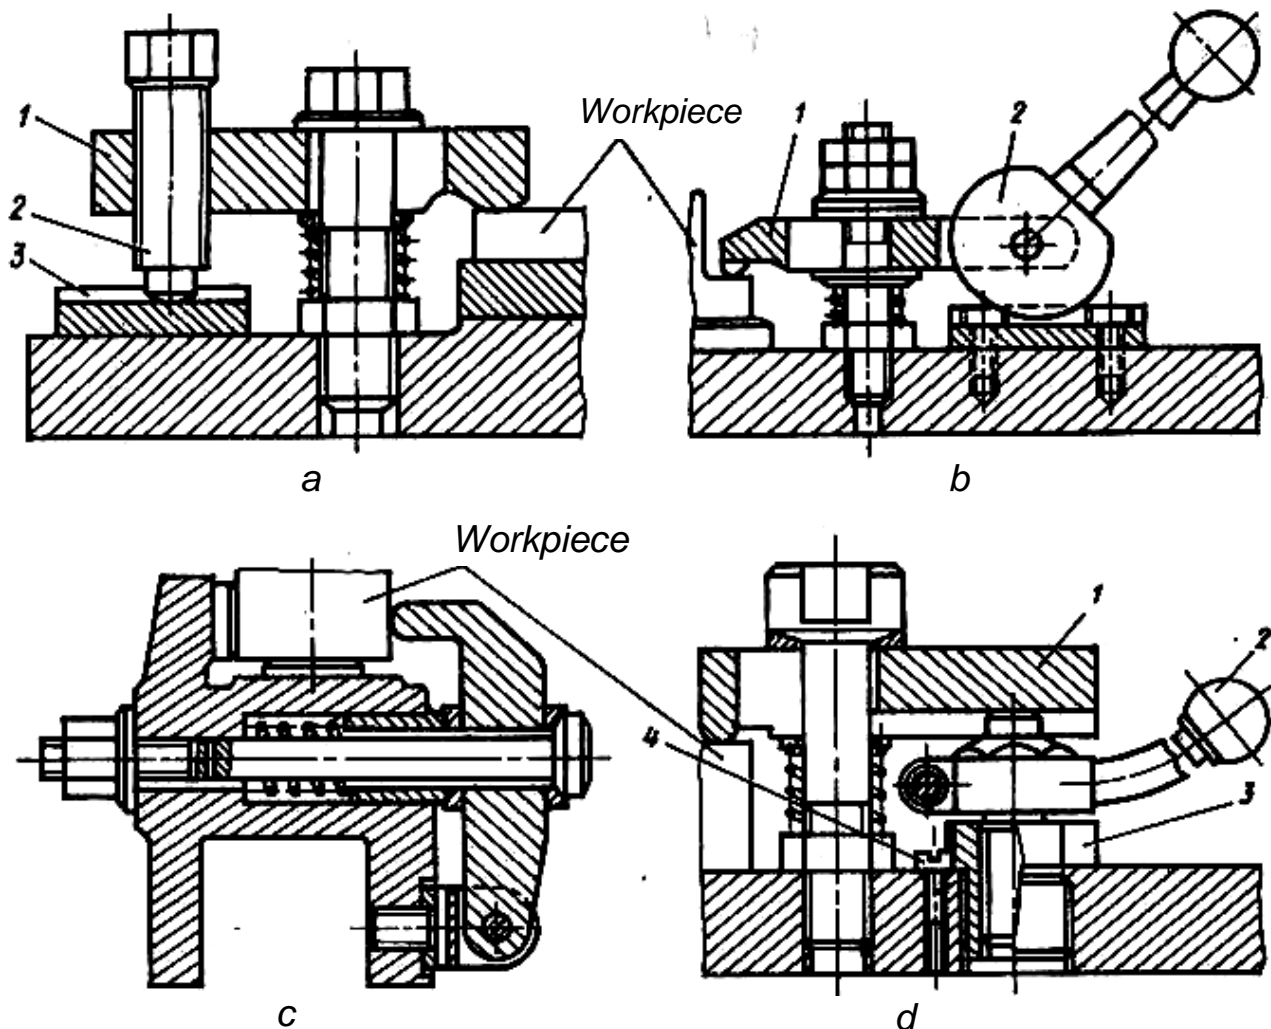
Types of strap clamps: a – screw; b – cam; c – lateral; d – with a screw-jack
